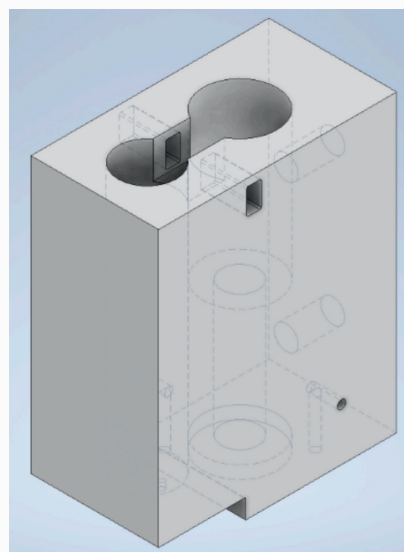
Technical drawing of cell holder for CLIC microscopy. The piezo would lie in the hole on the left and the rod would lie on the hole to the right having the lens at the bottom.
